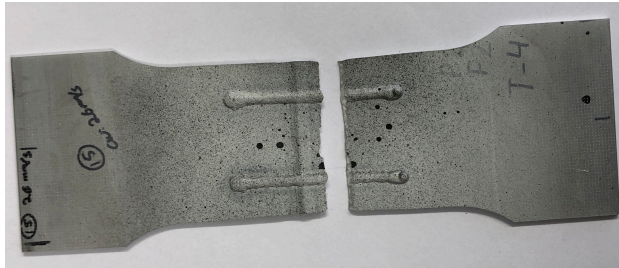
Fractured specimen with cross weld speed 26 mm/s, without PWHT.
